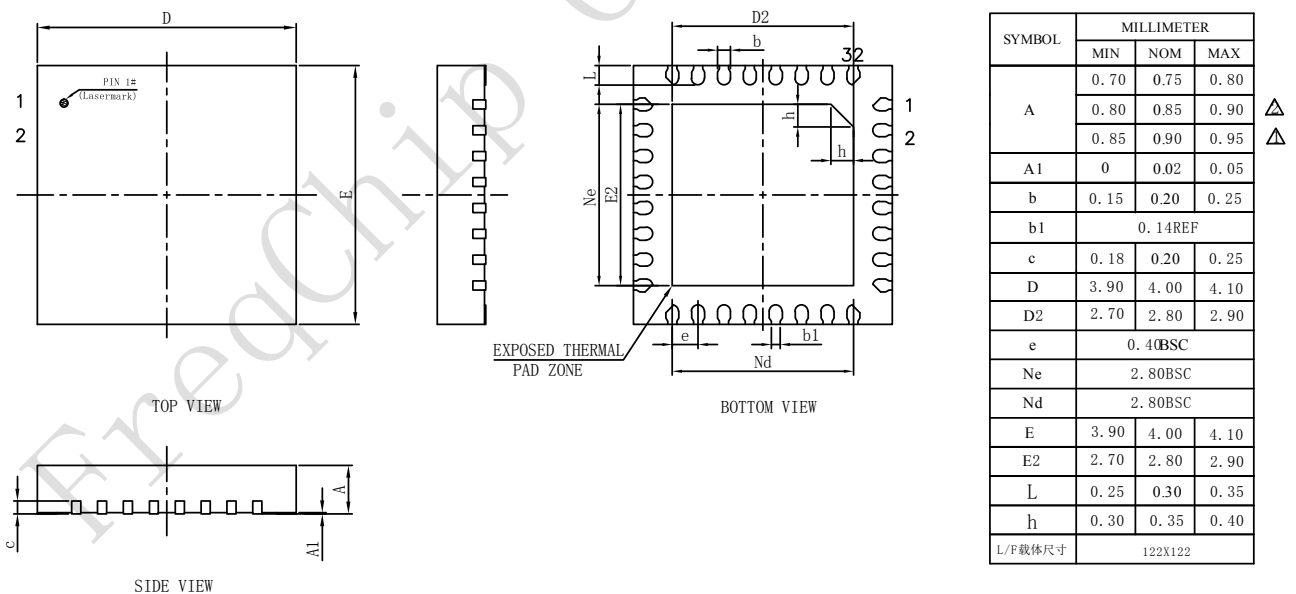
FR2012A/FR2012B Package Physical Dimensions
